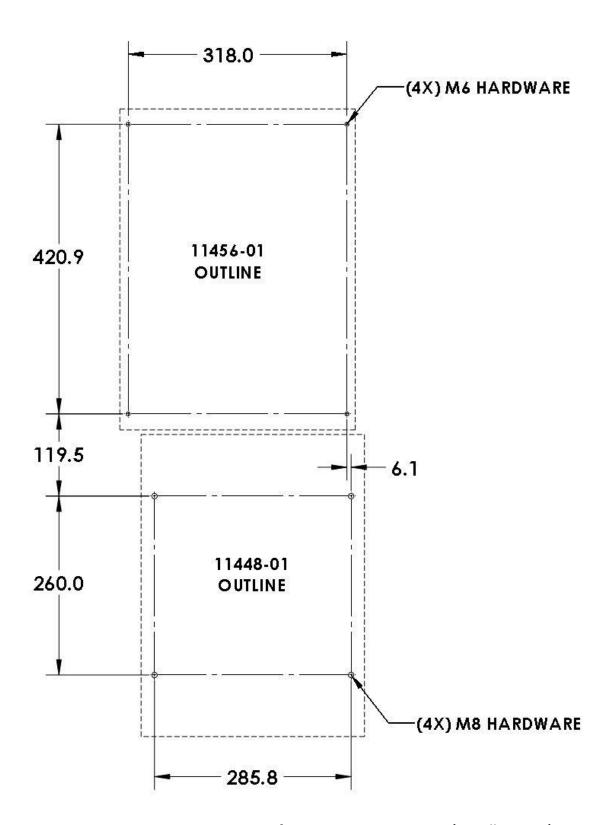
Mounting Pattern for OZip DC-DC Converter (in millimeters)
